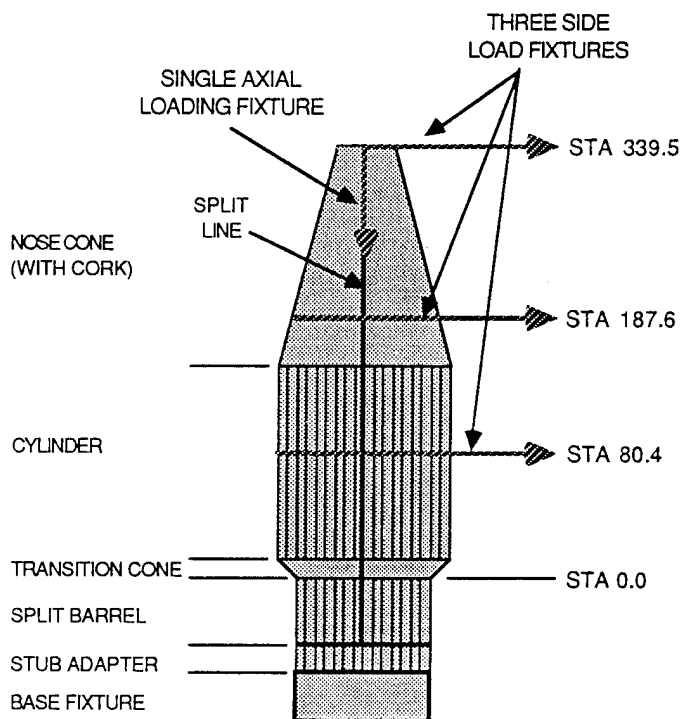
11-Foot Diameter Payload Fairing Structural Test Loading Fixtures.
